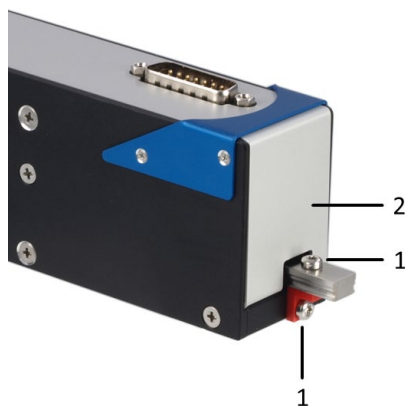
Transport safeguard on the side of the linear actuator V-273.44x, hole pattern and the transport safeguard are identical for the V-273.440 and V-273.441
